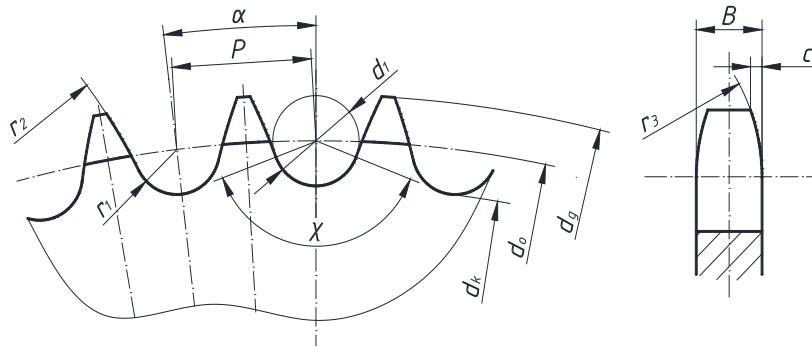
Sprocket geometry dimensions given by DIN 8196 [5]
